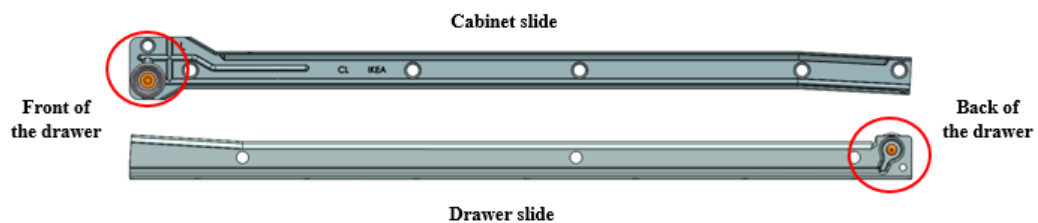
Position of the wheels on the cabinet and the drawer slide.
